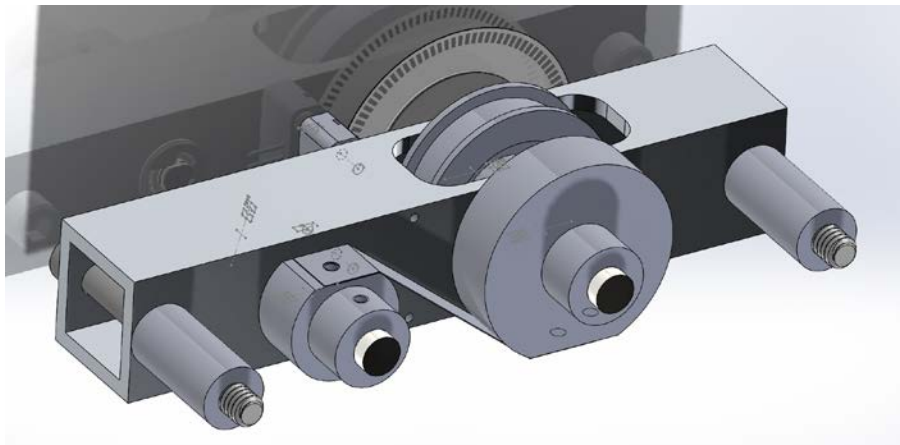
Rear view of drawstring-style encoder assembly highlighting constant force spring and drum-spools.
